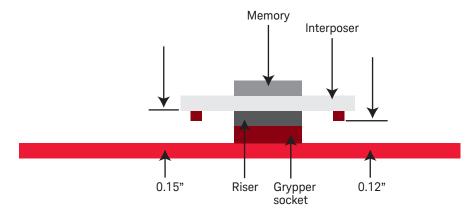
W4631A DDR4 x16 BGA interposer with riser plus optional grypper socket underneath.
